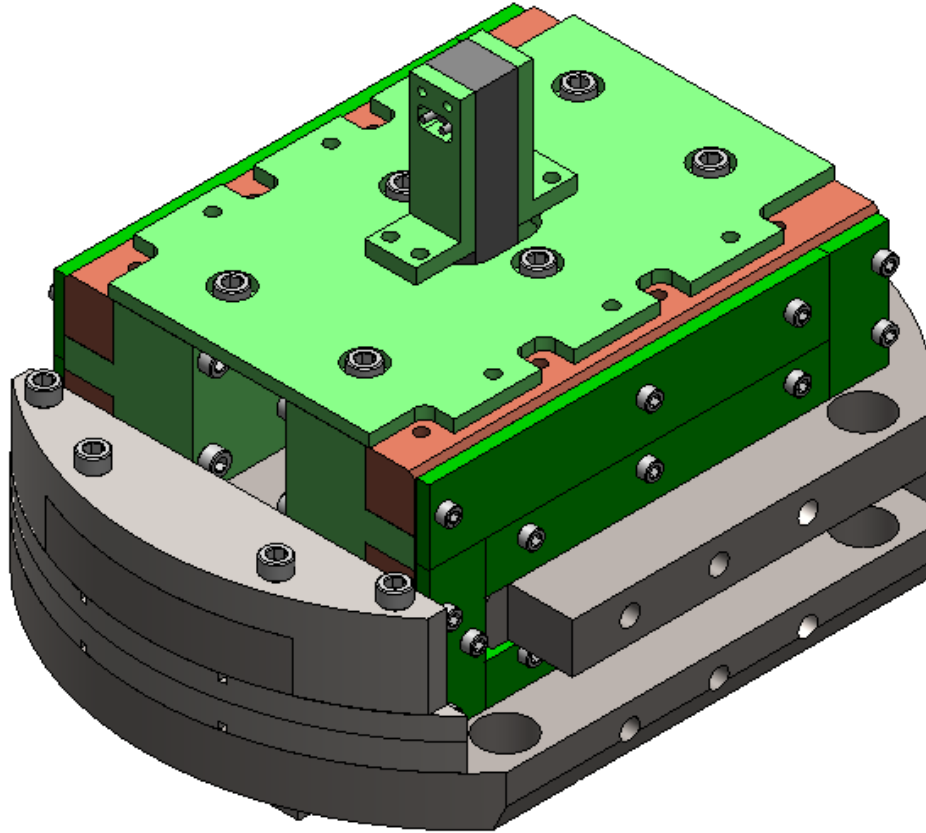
View of what experimental assembly should look like when it's fully assembled.
